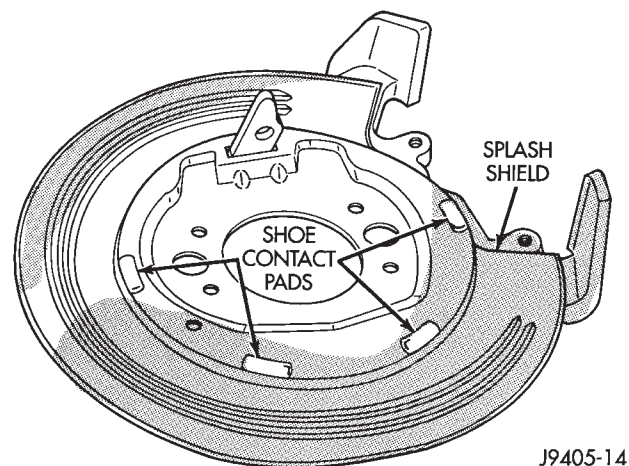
Shoe Contact Pad Locations On Splash Shield
